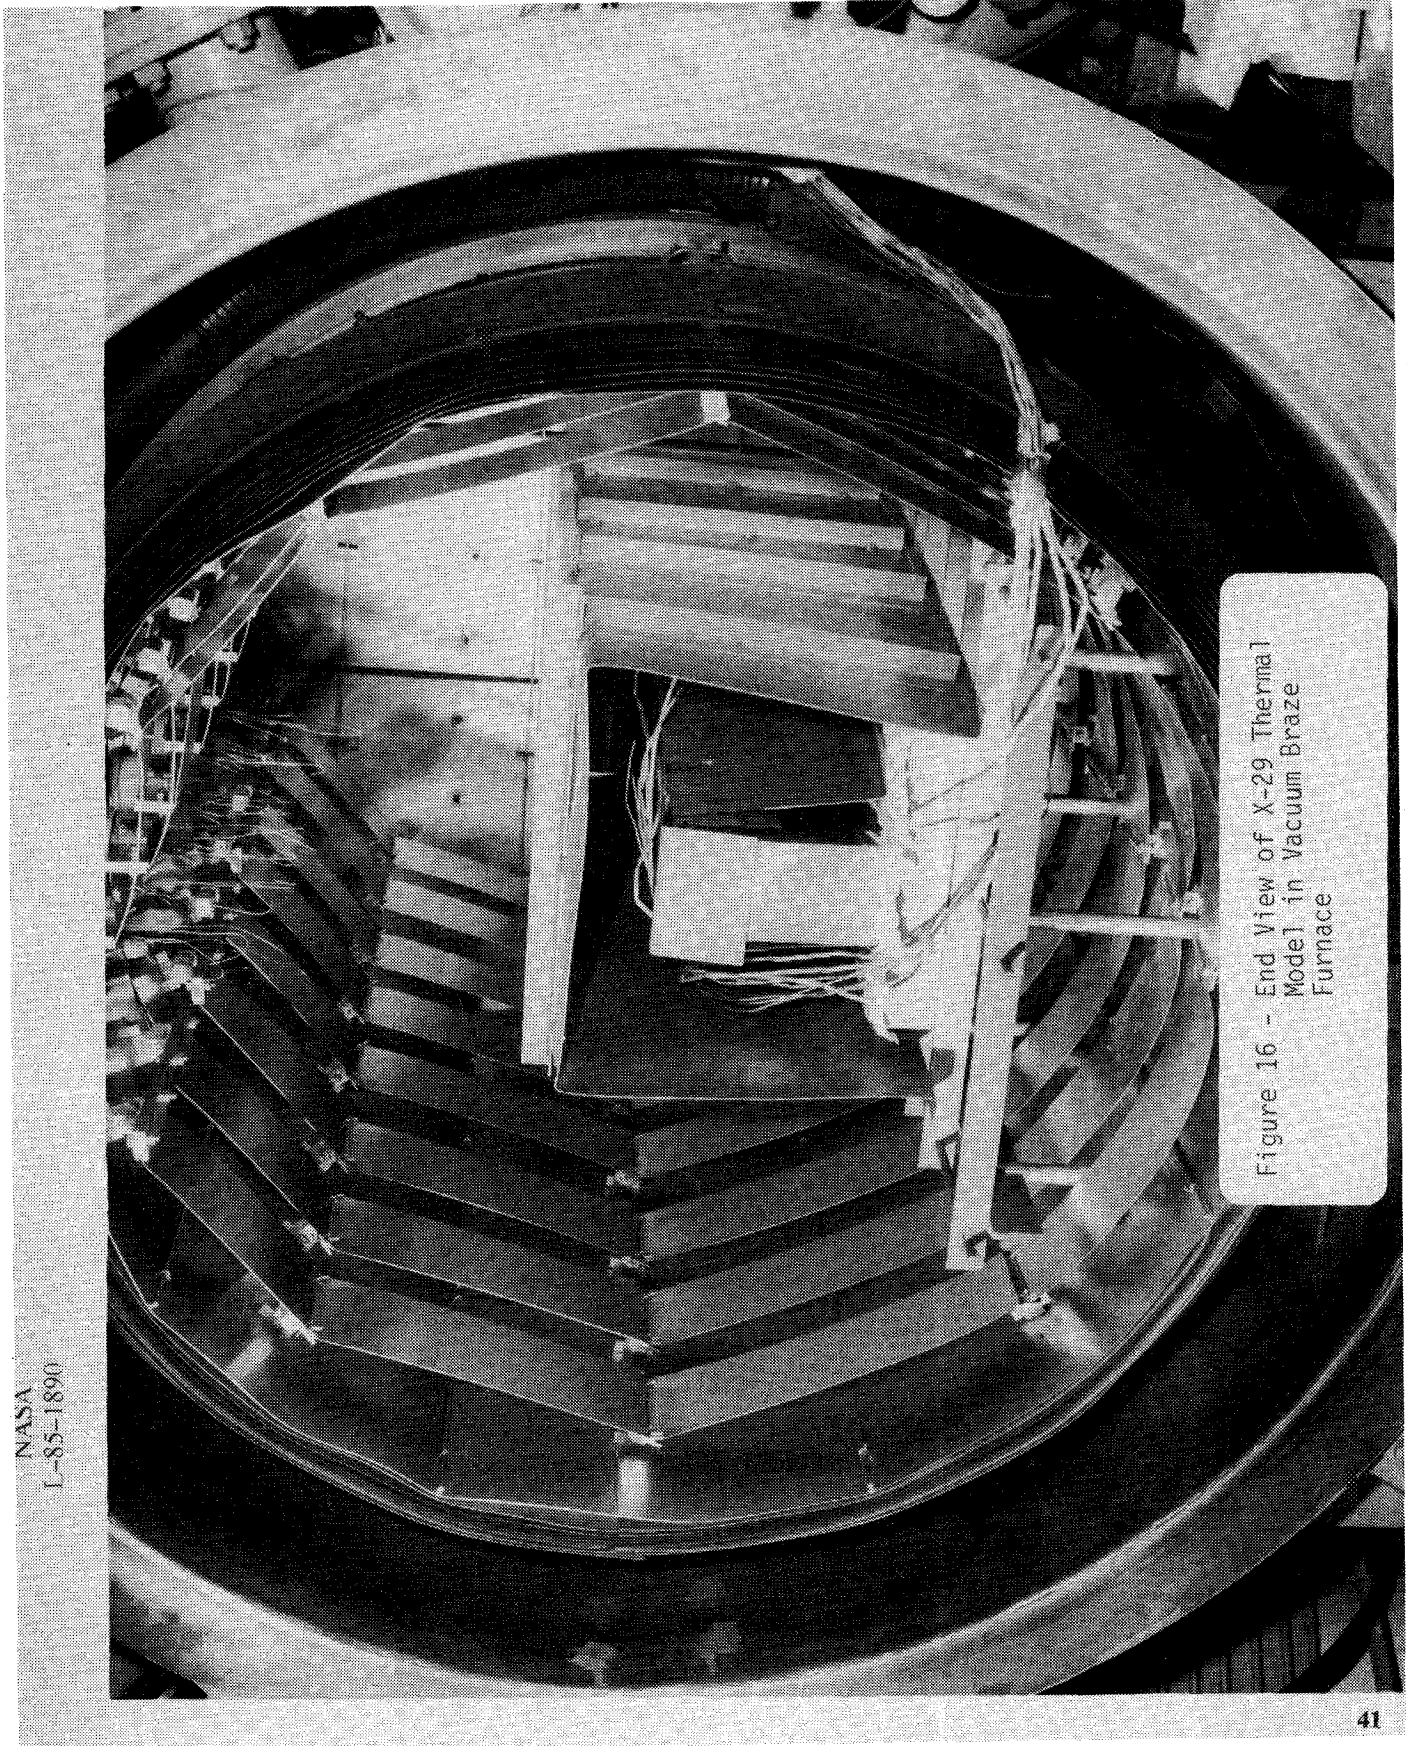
End View of X-29 Thermal Model in Vacuum Braze Furnace
